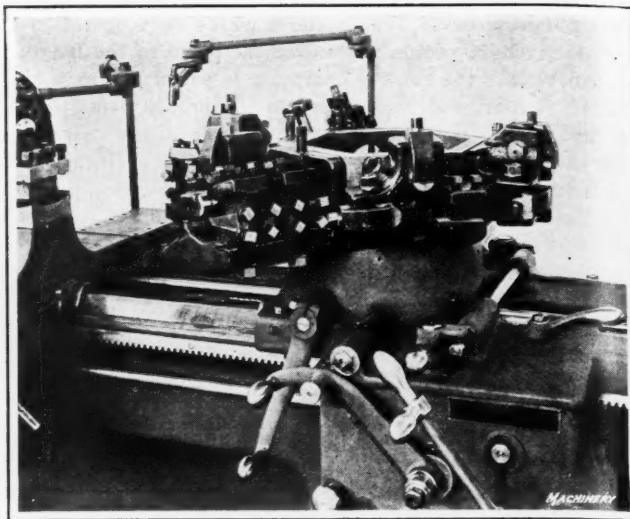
Close View of Turret, showing Lever that controls Quick-traverse Mechanism
